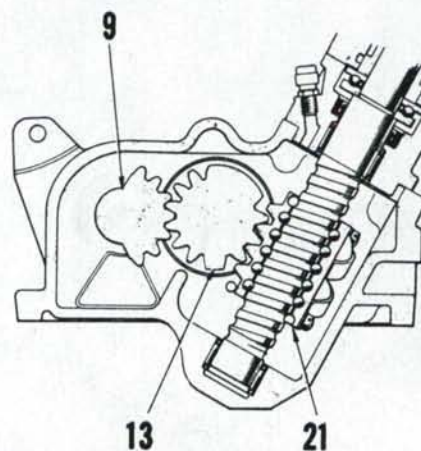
Cross-sectional view of steering gear assembly showing correct installation (timing) of sector gears and wormshaft; refer to Fig. 6 for exploded view of unit and for parts identification.
